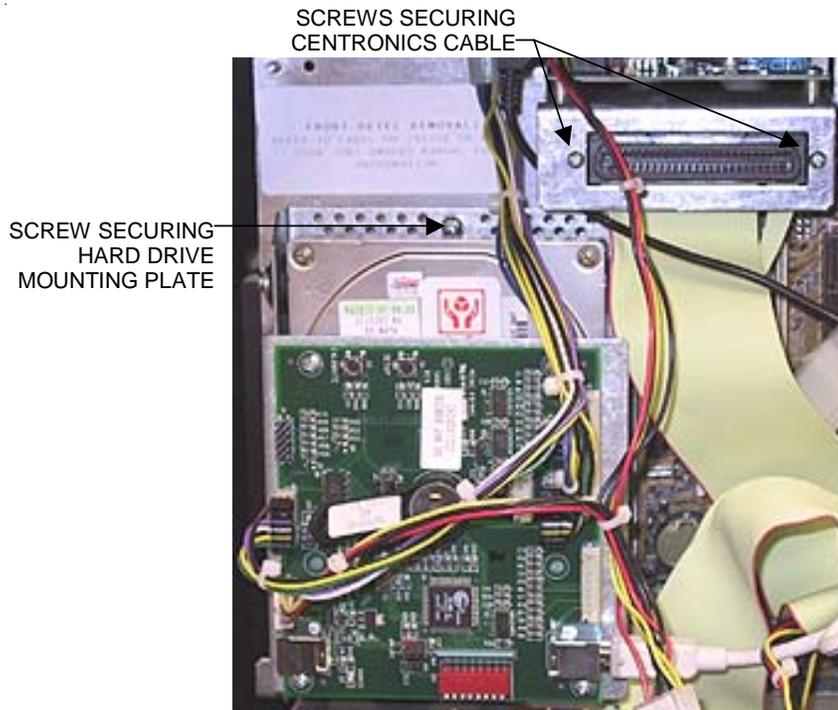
MOTHERBOARD/HARD DRIVE REMOVAL
